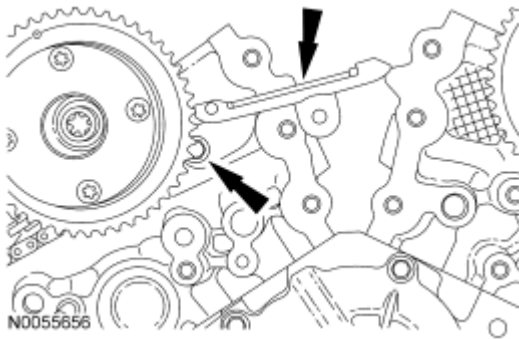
Locating RH Primary Timing Chain Guide Upper Bolt
